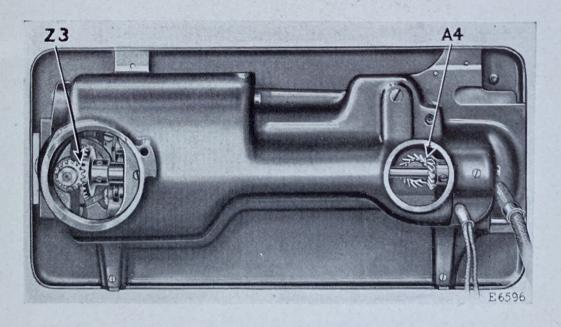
Base View, Showing Bevel Gears in Bed of Machine
